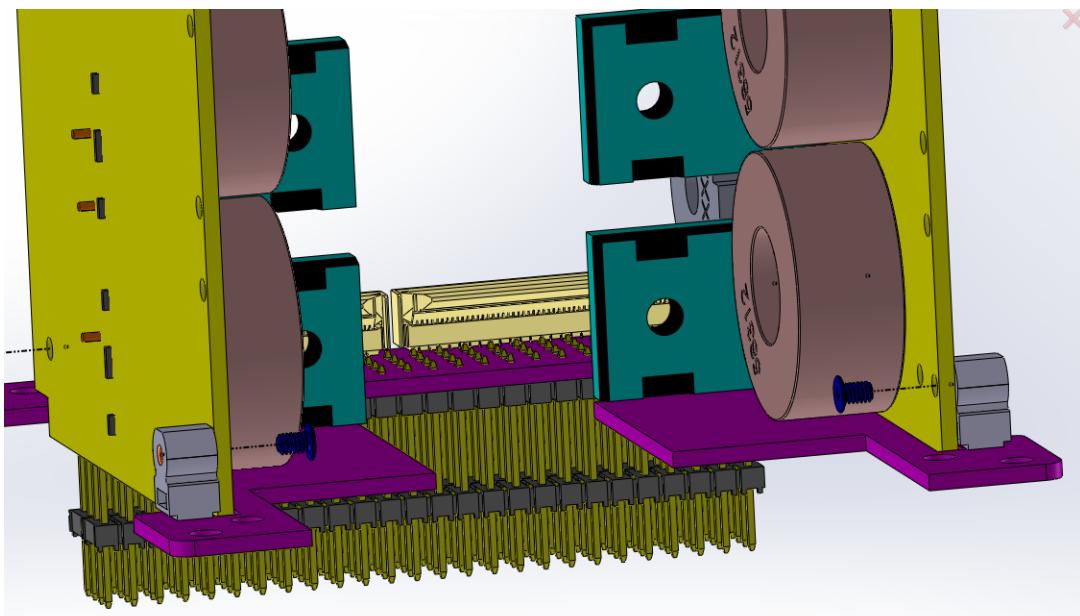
Use TWO M2 Board connection screws to connect the INNER FRONT of BPL and BPR to the Bottom Board's Right Angle Connectors.
